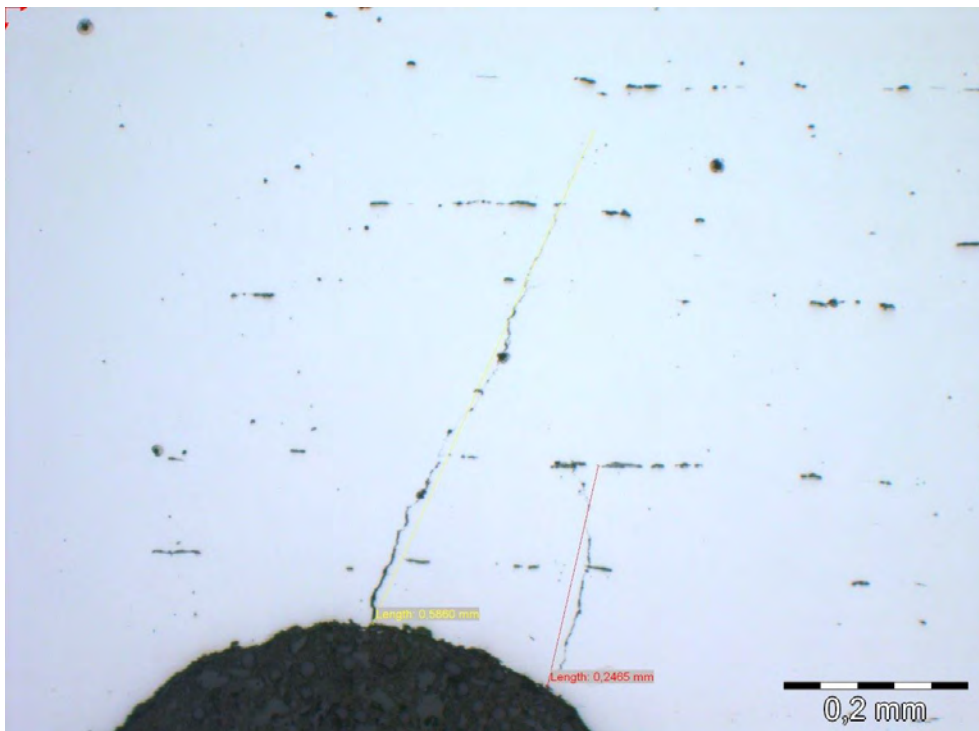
Crack at segment C, second ridge on barrel no. SFK 0123-A
